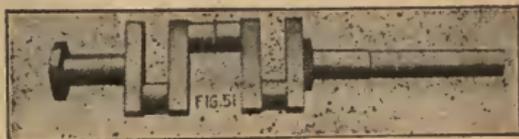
Two-bearing crankshaft on Avery four-cylinder opposed engine.
